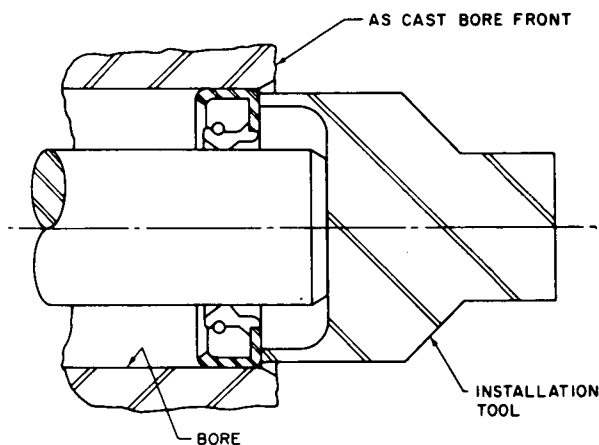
THROUGH BORE: INSTALLATION TOOL BOTTOMS ON SHAFT
